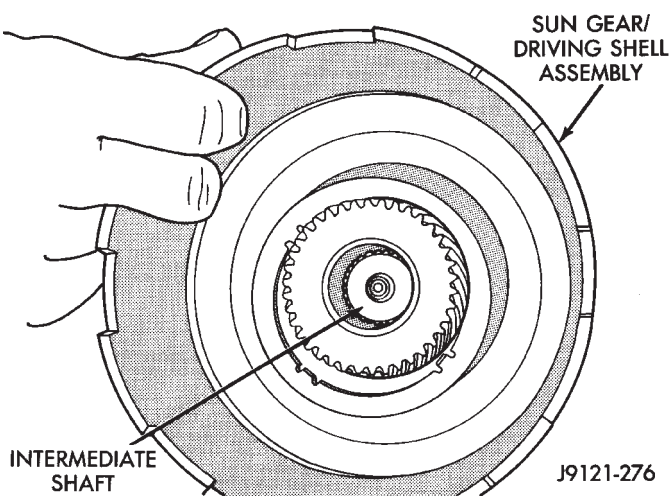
Installing Sun Gear And Rear Thrust Plate In Driving Shell
